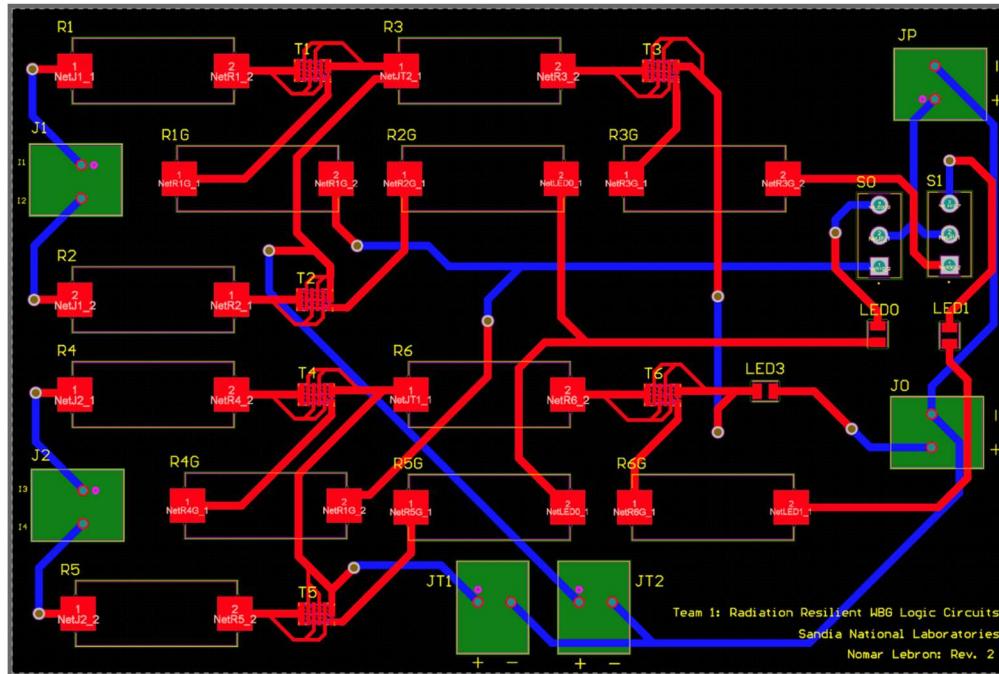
4:1 MUX Altium Designer PCB Layout Revision 2
